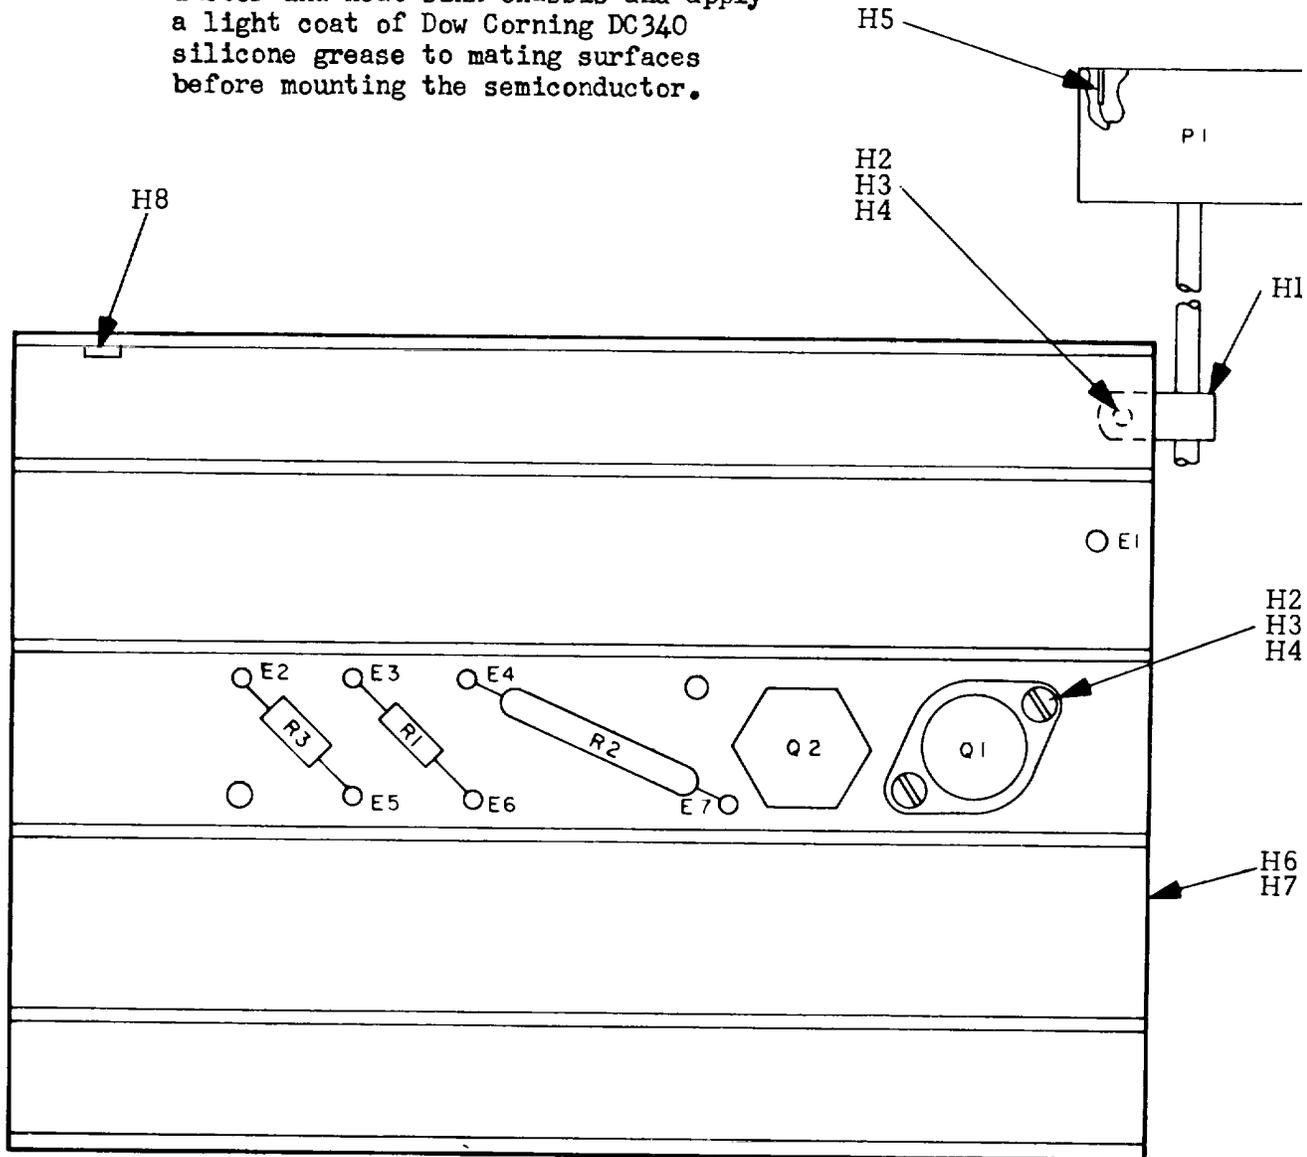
Power supply heat sink assembly A5, component location diagram.
